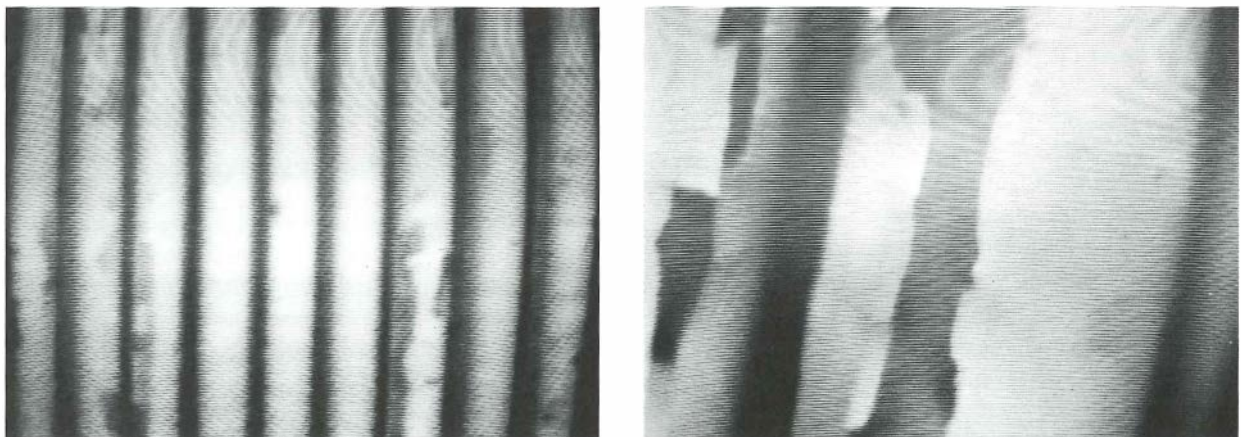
Spalling corrosion film on four-cycle fuel assembly, shown at approximate magnifications of 0.8 (left) and 8 (right).
